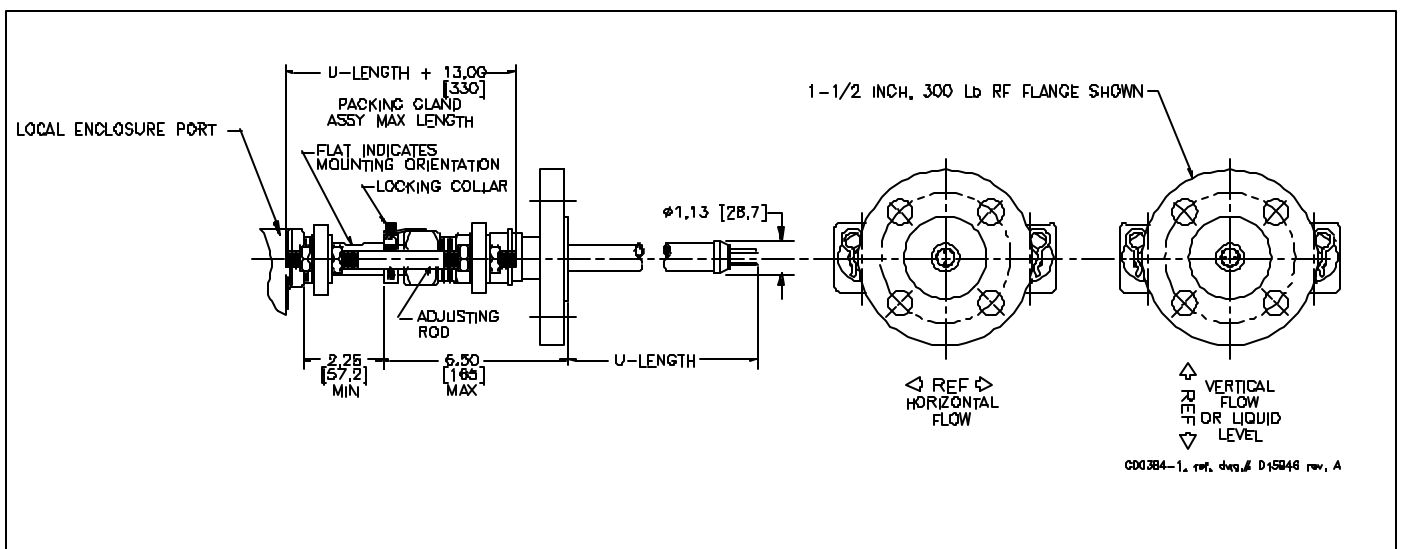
Flanged Medium Pressure Packing Gland Process Connection
